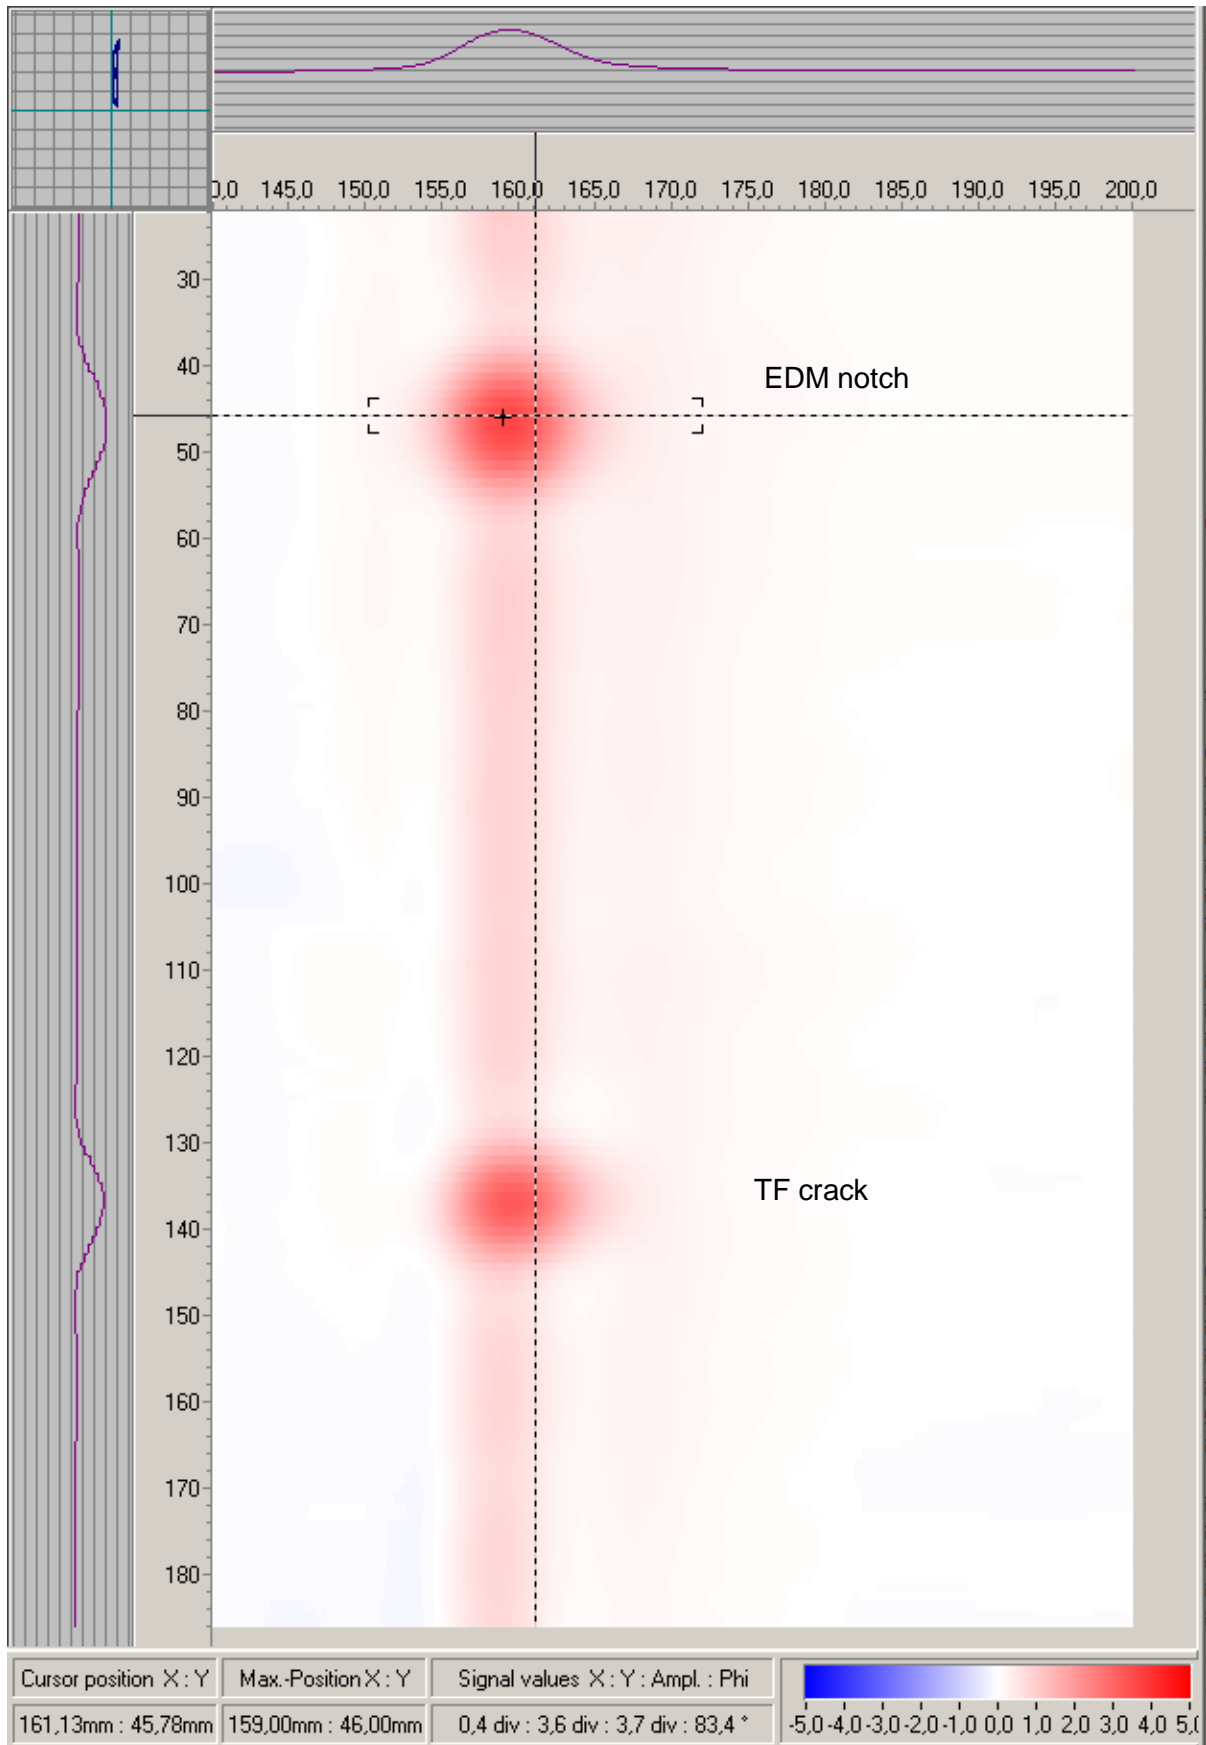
C scan of test piece TF, indications of a notch and a TF crack, probe SPO-2210, applied frequency 10 kHz.
